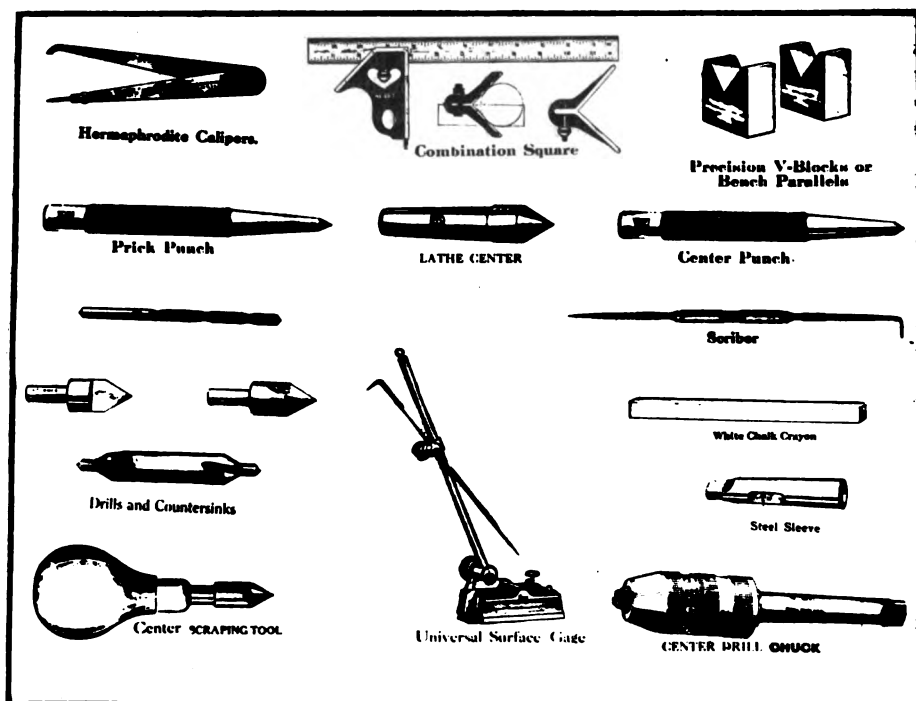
Tradesmen Have Developed Many Tools for Locating and Drilling Center Holes.
